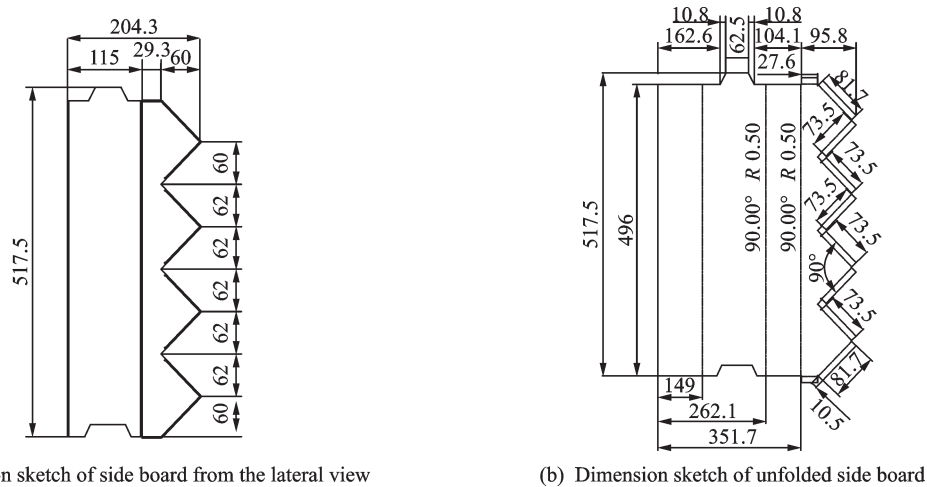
Dimensional sketch of the side board of no-riveted noise barrier unit plates
